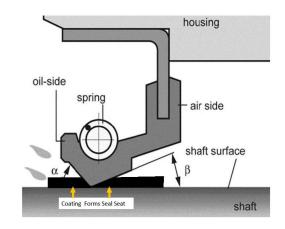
Shaft coated with AAGC to form an abradable seal seat
